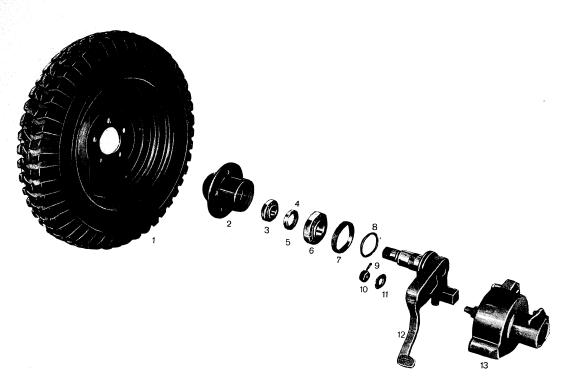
WHEEL WITH PNEUMATIC TYRE — DISMANTLED (for weapons B1 and B1A1)
